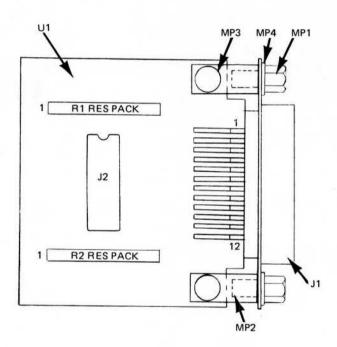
Component Locations, Interface PC Assembly A1A2A1
